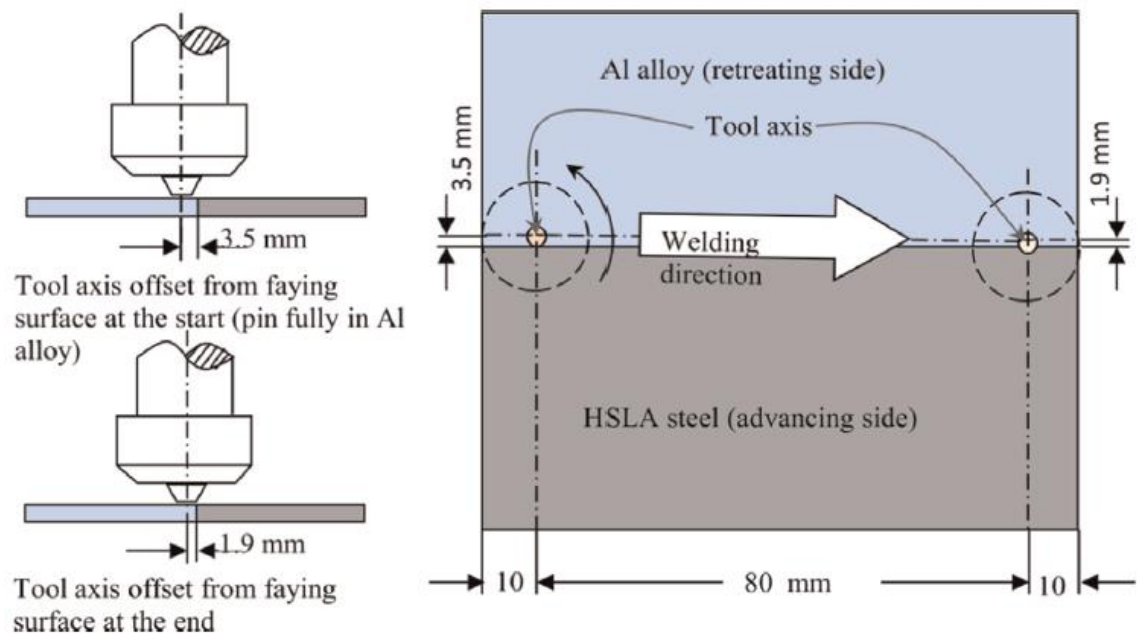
Schematics of tool axis offset used for tool T1 [28].
